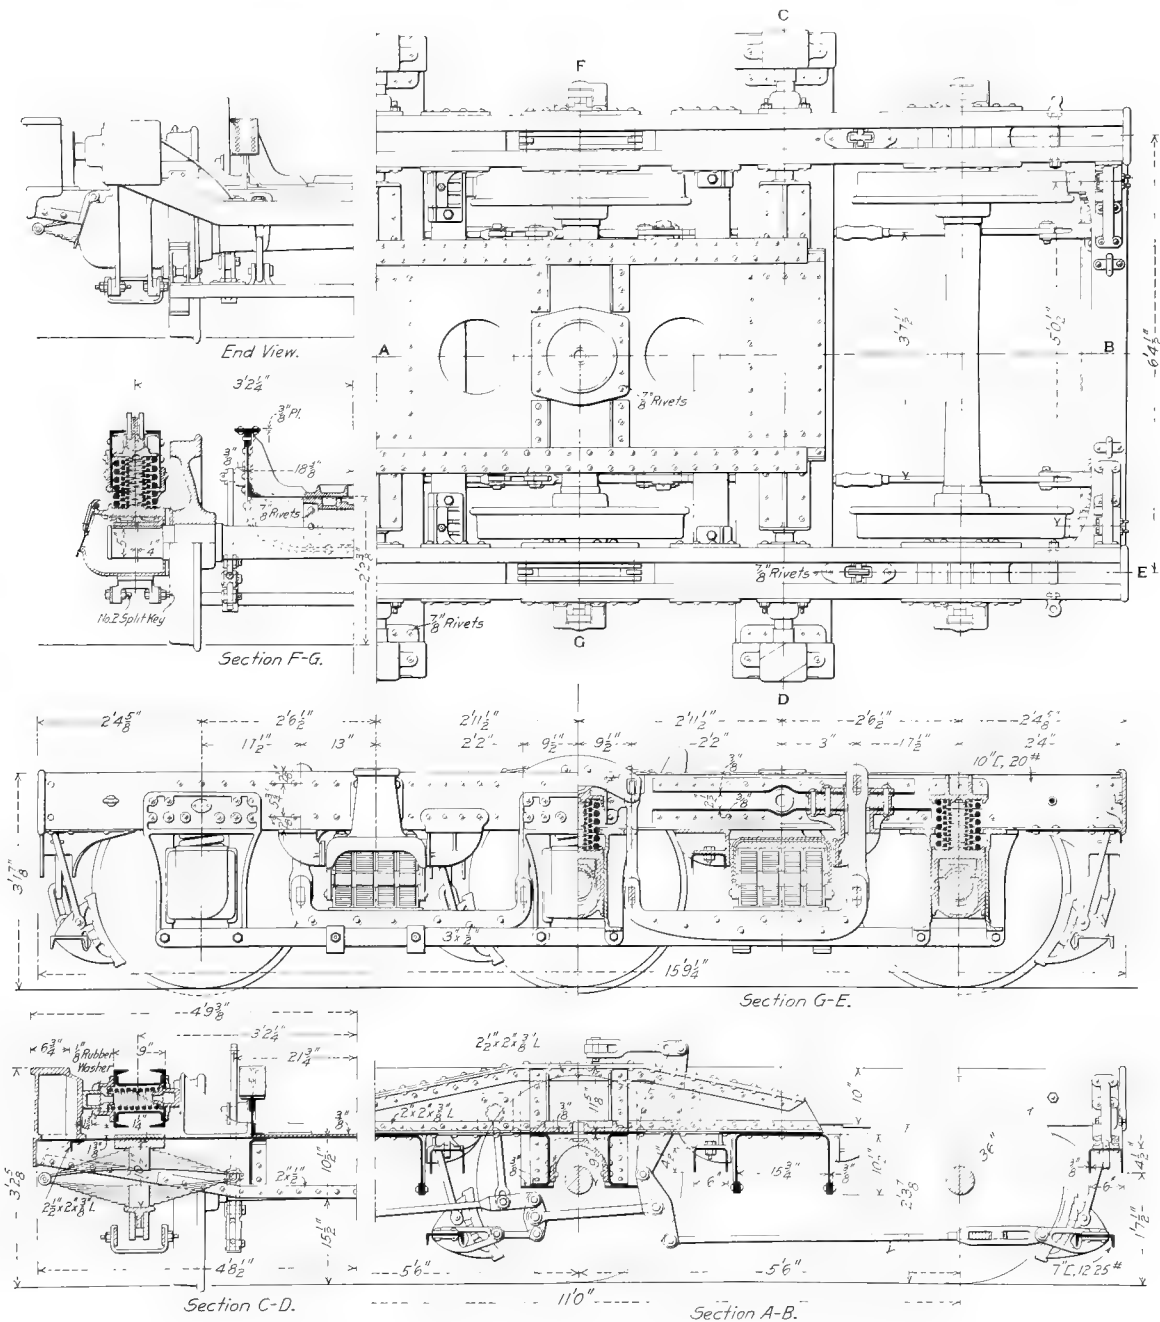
General Arrangement of Pennsylvania Railroad Six-Wheel Steel Truck Shown in Fig. 1011.
